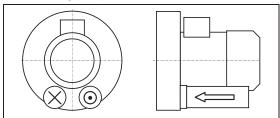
2BH1... (single-impeller pump-motor units), 2BH9 23
